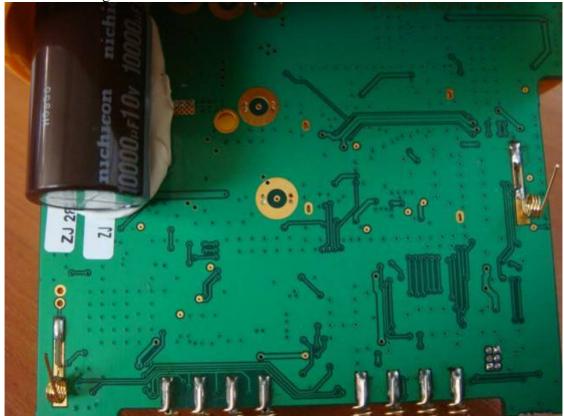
The PCB (back view) after immersion test. There is no free water.
